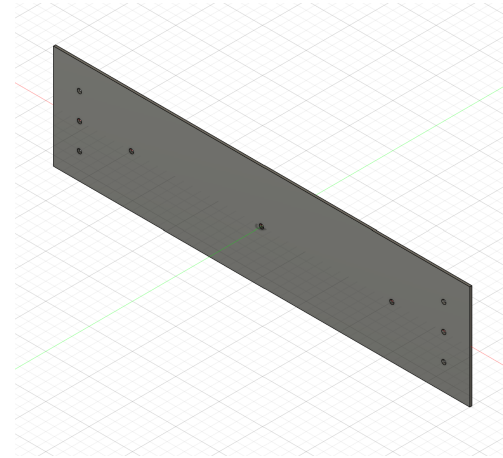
The 3D view of PT-00001 with the holes drilled.
